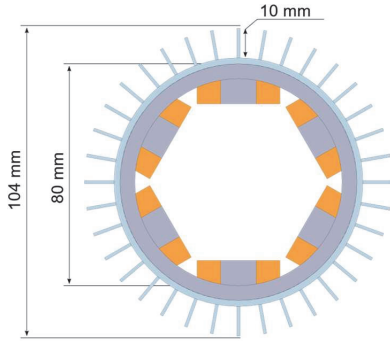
Cross-section of the switched reluctance machine with an axial straight fin heatsink.
